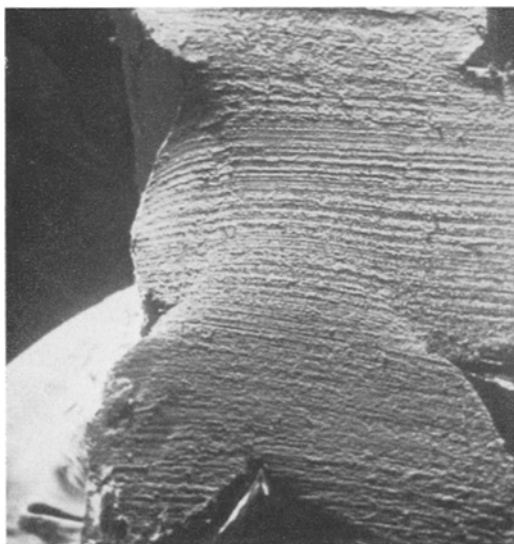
With the welding beads left on, failure is always caused by the notch between the welding bead and the gauge length in PB-1 welds. Optical micrograph.
